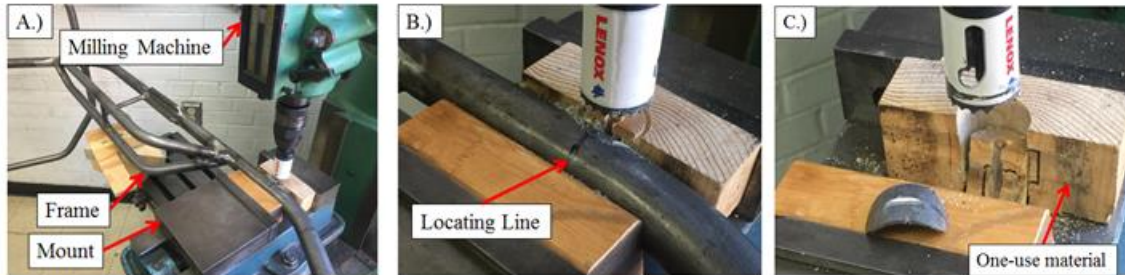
Mitering an offset hole A.) Frame mounted to milling machine B.) Before miter C.) Post miter
